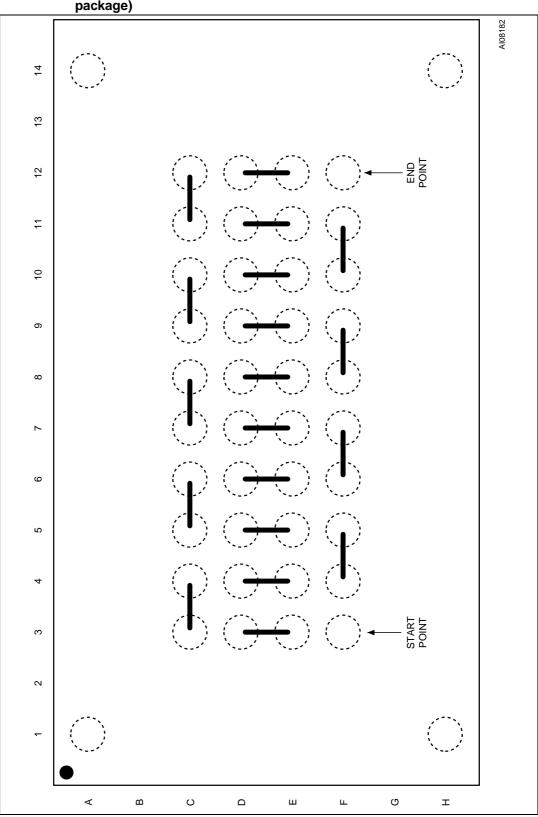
VFBGA44 daisy chain - PCB connection proposal (top view through package)
